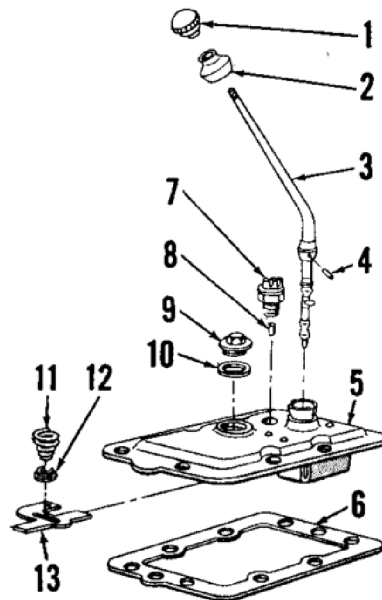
Exploded view of four-speed transmission shift cover. Refer to Fig. 184 for remainder of shift mechanism.
